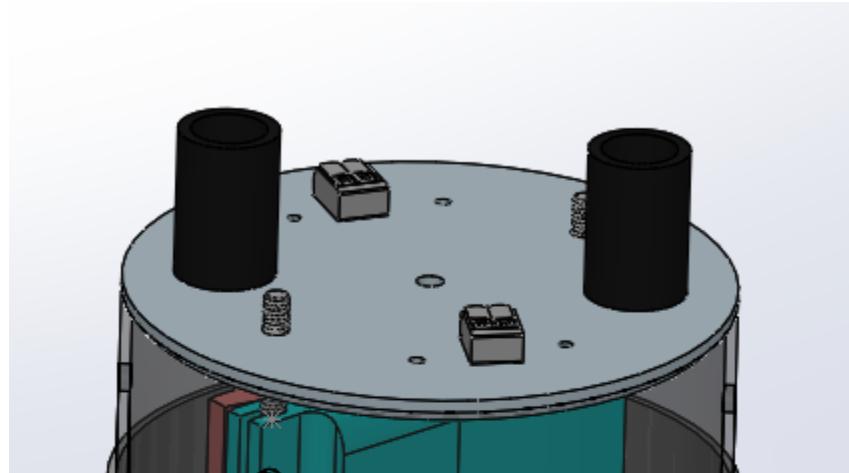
Charge canisters, Wire Connectors, Wire Holes and Threaded Rod Placement on Bulkhead
